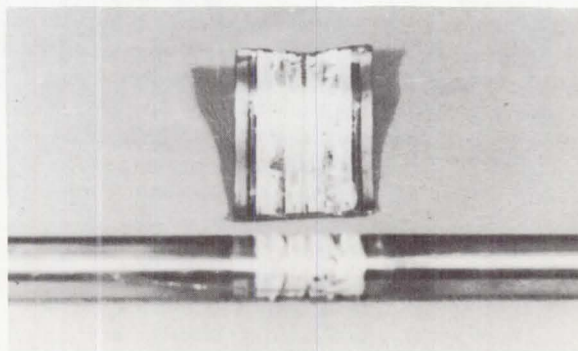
Peel tested exothermically brazed tube coupling showing flow of filler alloy
